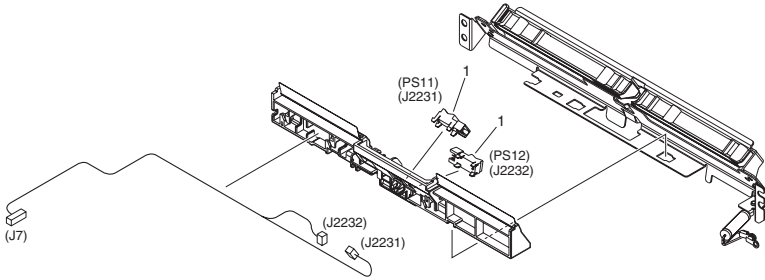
MULTI PAPER PICK-UP ASSEMBLY
